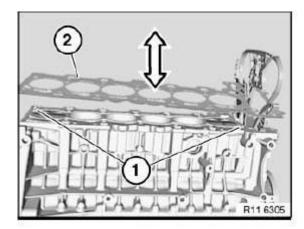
Identifying Rubber Coating And Cylinder Head Gasket Courtesy of BMW OF NORTH AMERICA, INC.
